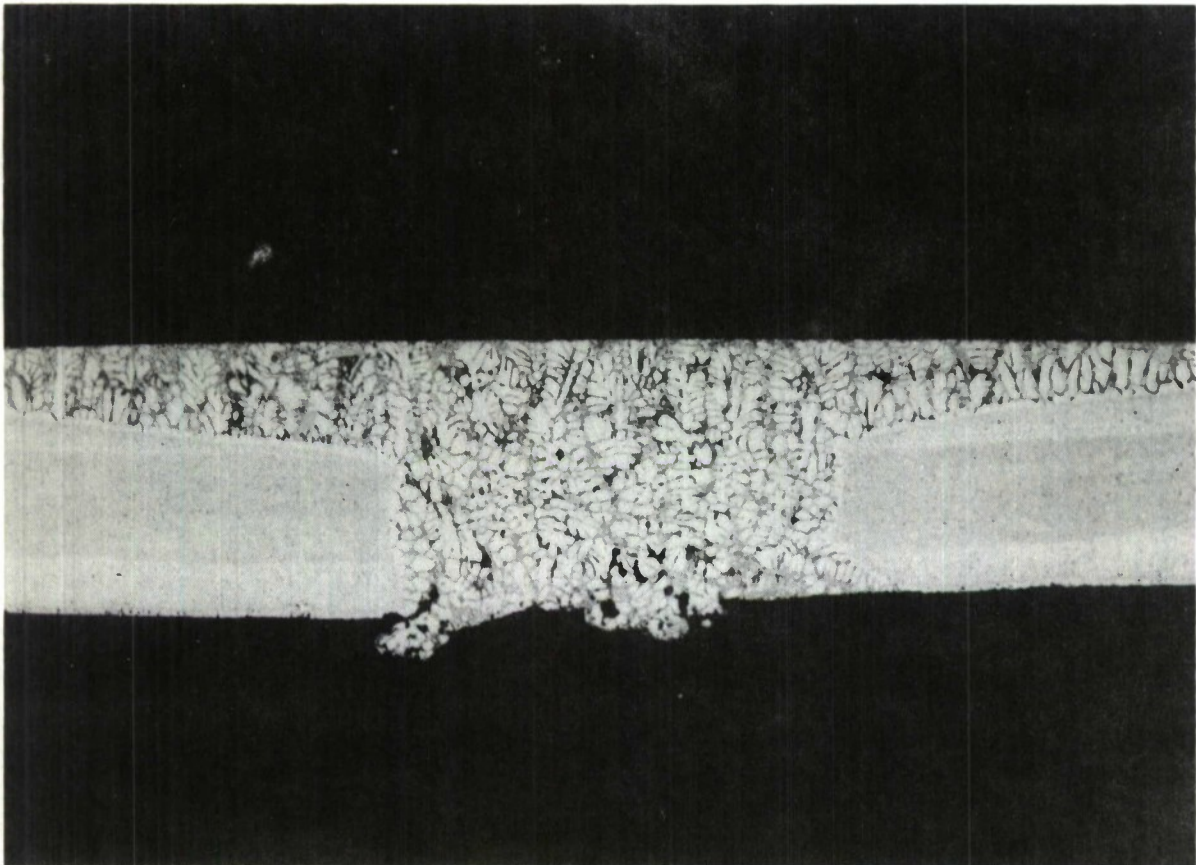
Y-99740 Macro of Pad Test on Al-Si-Ge Alloy No. 5 Vacuum Brazed 7 min at 1022°F
